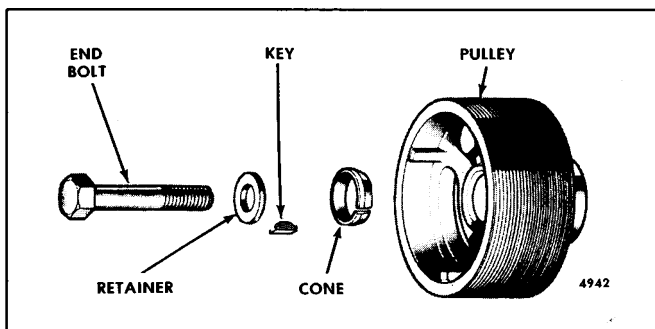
Crankshaft Pulley Details and Relative Location of Parts
